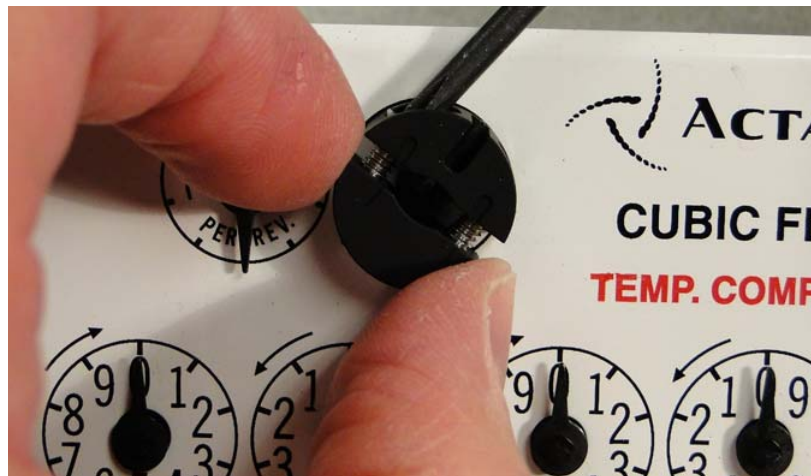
8. Thread Screws Into threaded Wheel Half
